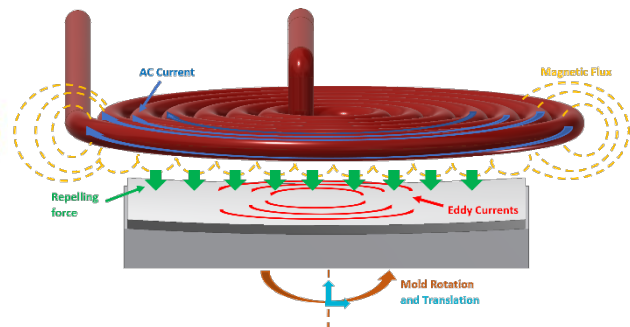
Experiment diagram with the aluminum plate taking the shape of the mold.
